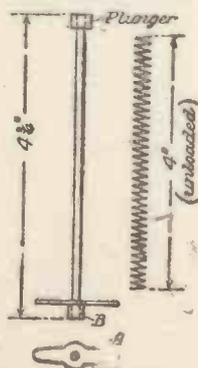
Spring-rod, Catch-plate, and Spring.
